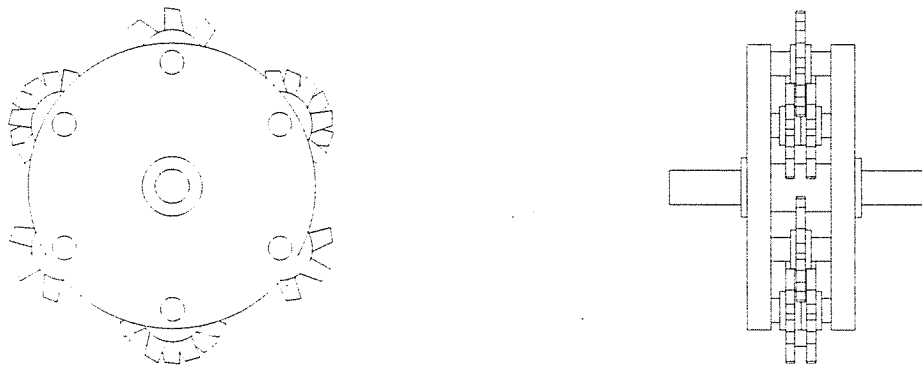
Front and Side Views of the Router Cutting Wheel
